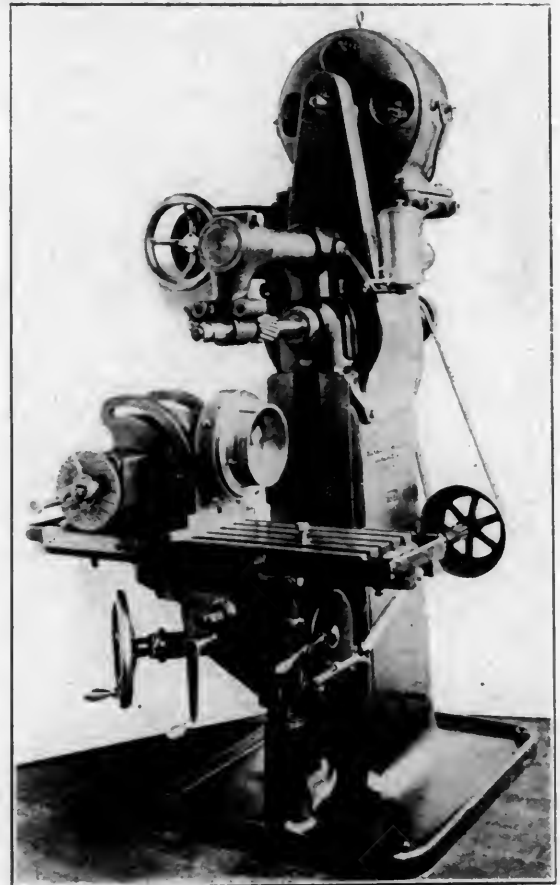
VARIABLE-SPEED DRIVE FOR A BROWN & SHARPE UNIVERSAL MILLING MACHINE.—ALL PARTS ENCLOSED.—CROCKER-WHEELER MOTOR.
